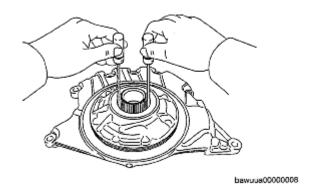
Turning Drive Gear With Flathead Screwdrivers Courtesy of MAZDA MOTORS CORP.
